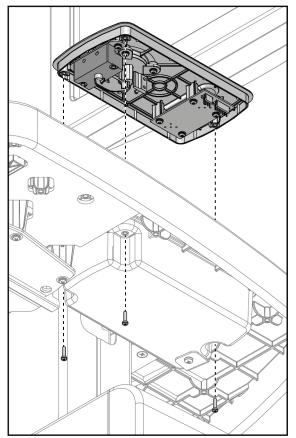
Removing the assembly from its housing (shows all cables already disconnected)
